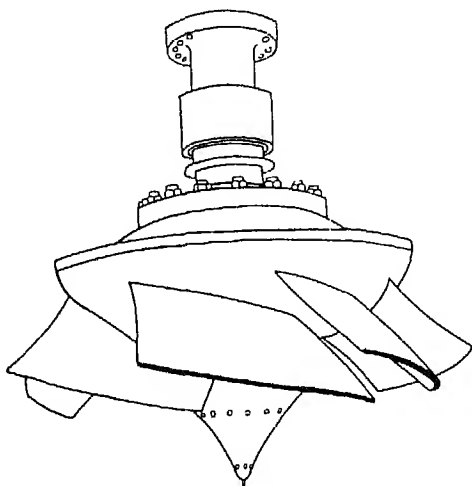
Assembly of the Deriaz Reversible Runner (Pump-Turbine Runner) for Sir Adam Beck Pumping-Generating Station in Canada.
